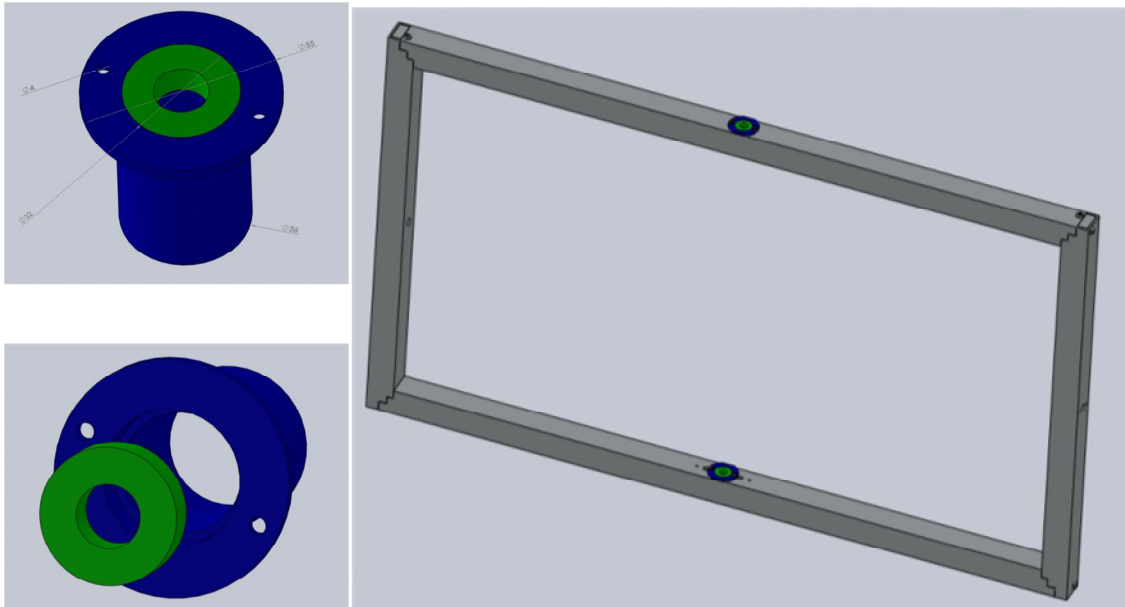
Bearings and their boxes insert into the frame: on the left the boxes are designed in blue, in green the bearings are sketched. On the right, their position into the up and bottom part of the frame
